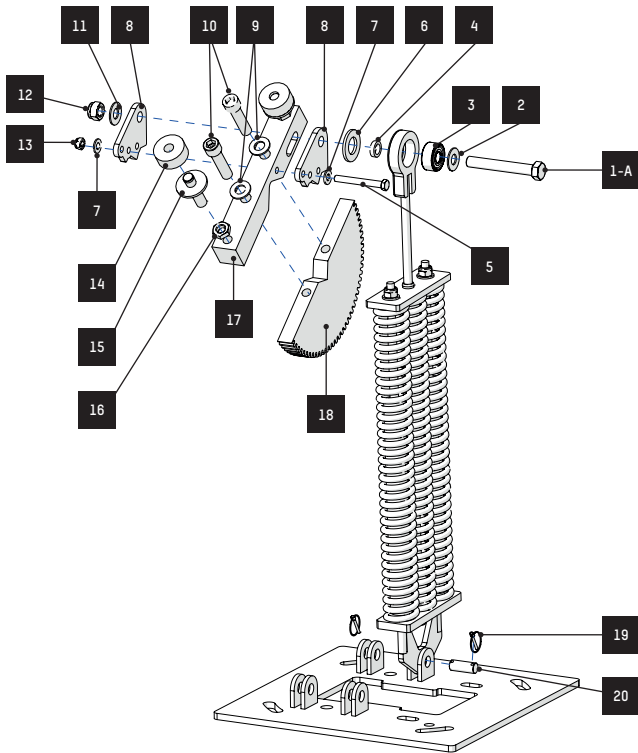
Installation of a spring assembly (1 to 3 springs)
